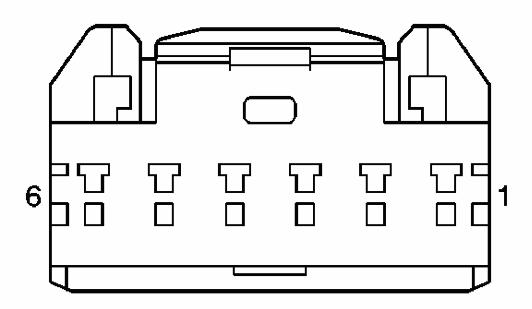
Driver Information Display Switch Connector End View Courtesy of GENERAL MOTORS CORP.
